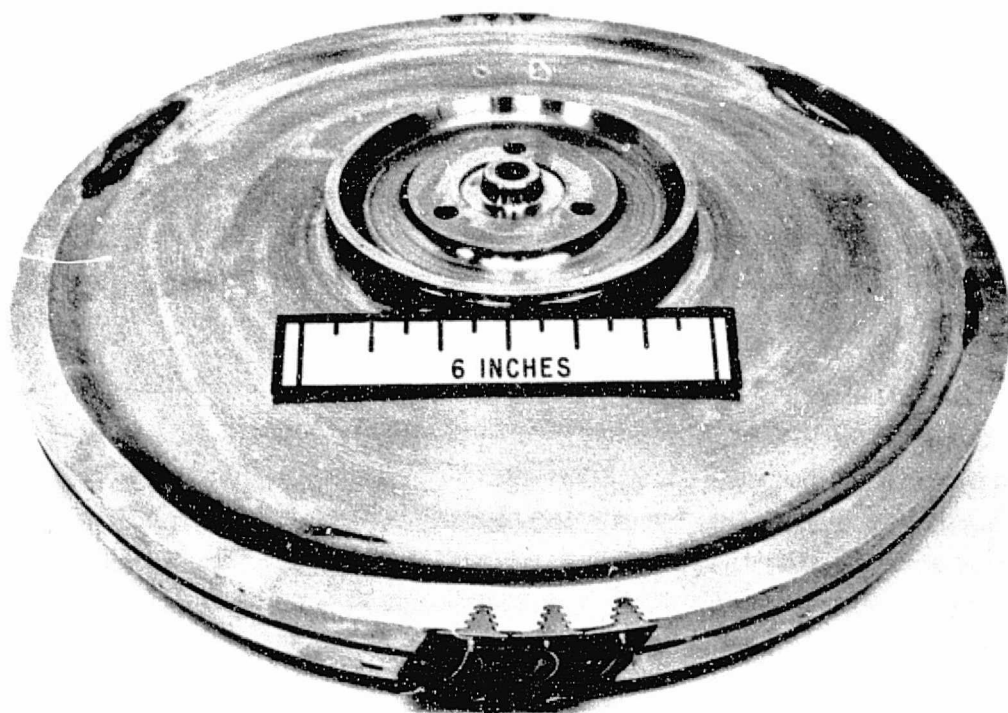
Seal Test Rig Wheel Showing MAR-M421 Alloy Stub Blades
